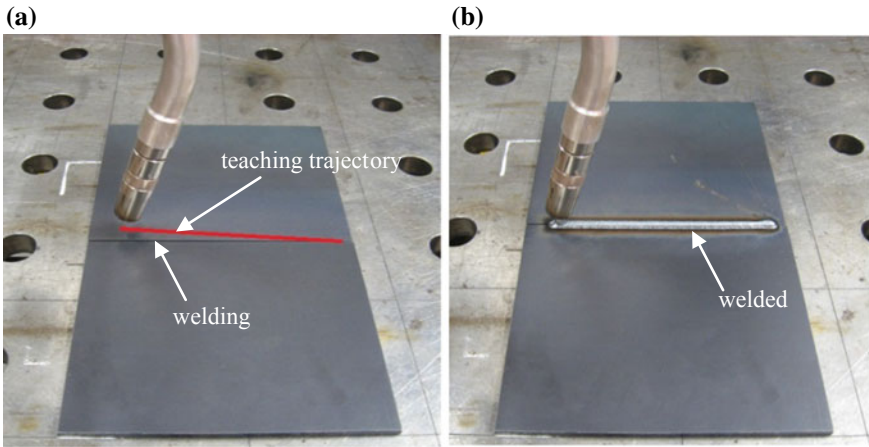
a Welding seam tracking experiments, b result after welding
